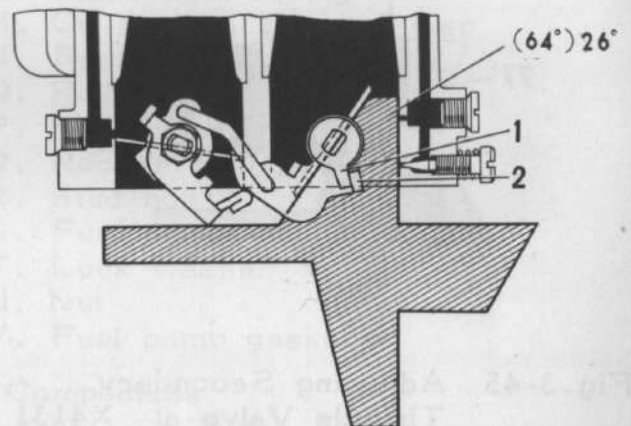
Start of Secondary X4129 Throttle Valve Opening
